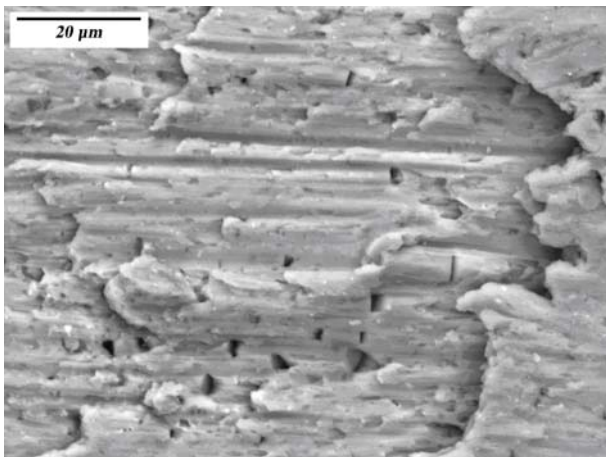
Machined surface of the aluminium composite (cutting parameters: $v_c = 100$ m/min, $f = 0.08$ mm/rev)
